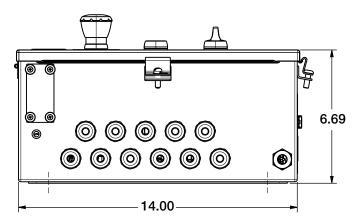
FlexWeigh System 104 Basic Filler Enclosure Dimensions
